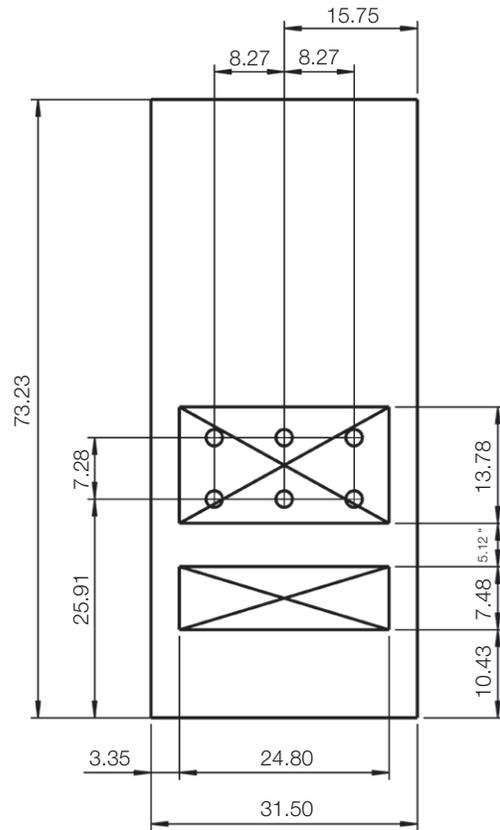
Feeder panel, Panel width 31.50 in, dimensions in inches
